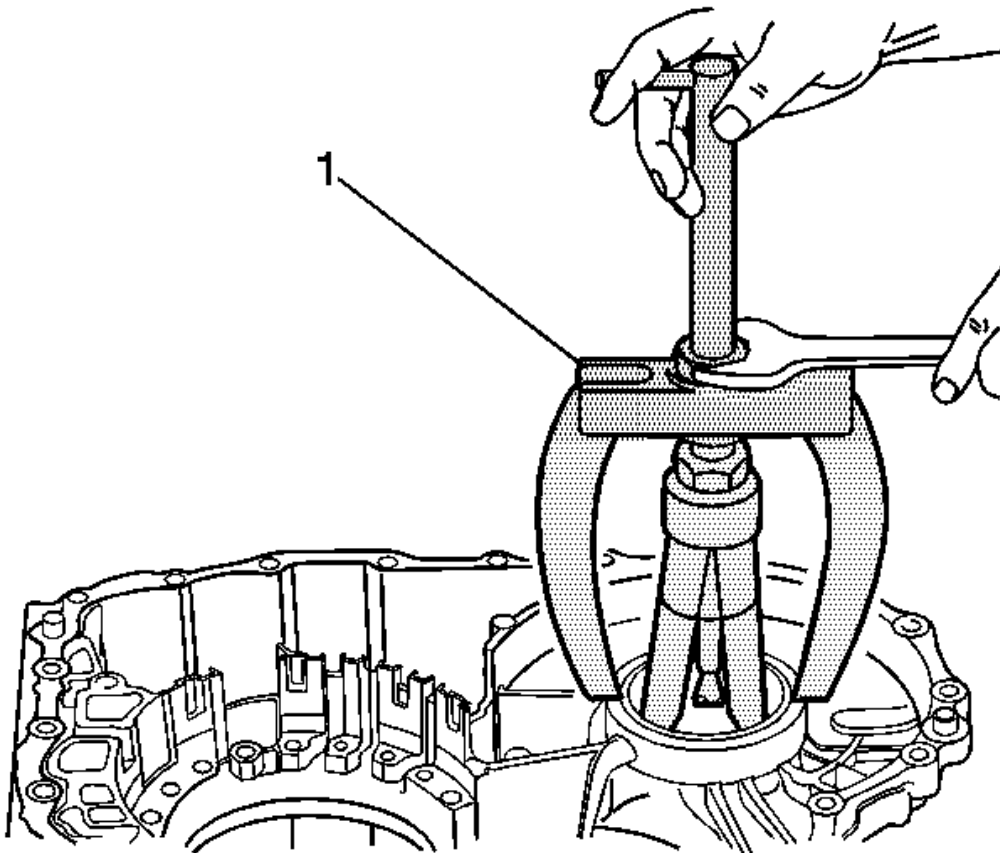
Transmission Fluid Pump, Front Differential Carrier Baffle & Front Differential Ring Gear
